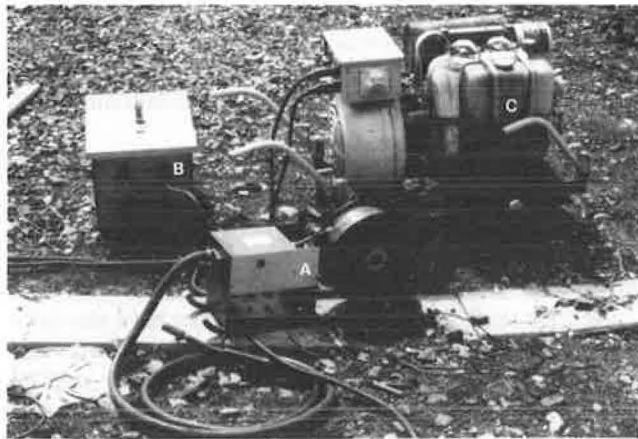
Equipment arrangement consisting of (A) welding torch, (B) converter, and (C) ac welding machine.
